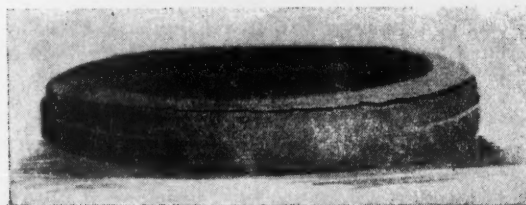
Characteristic failure of a welded ring of sheet copper.
